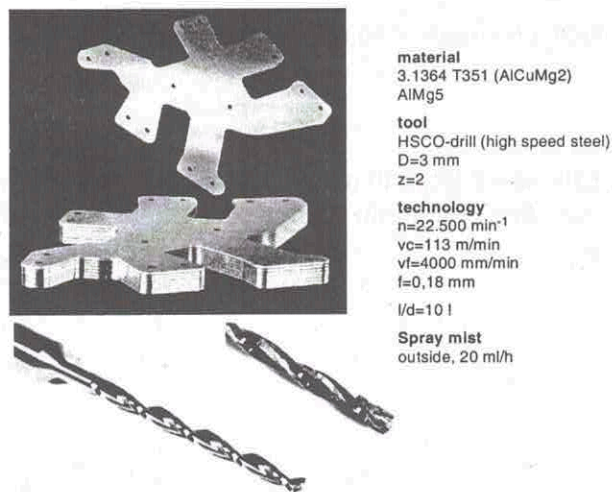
Example I - drilling sheet metal packages (wrought aluminum alloy)
